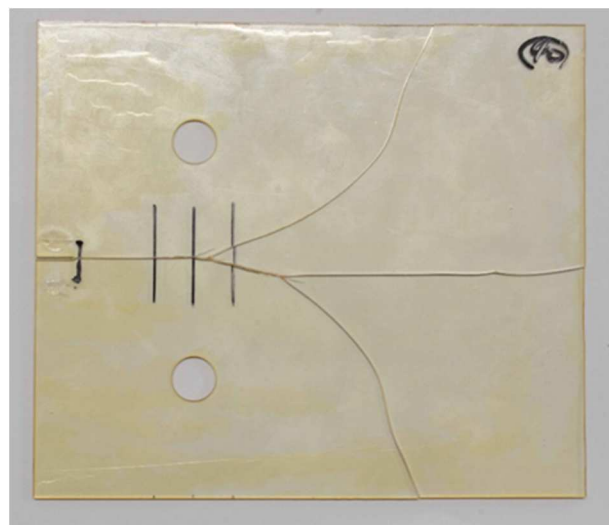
Fractured specimen (Fracture load: 1.15kN)
